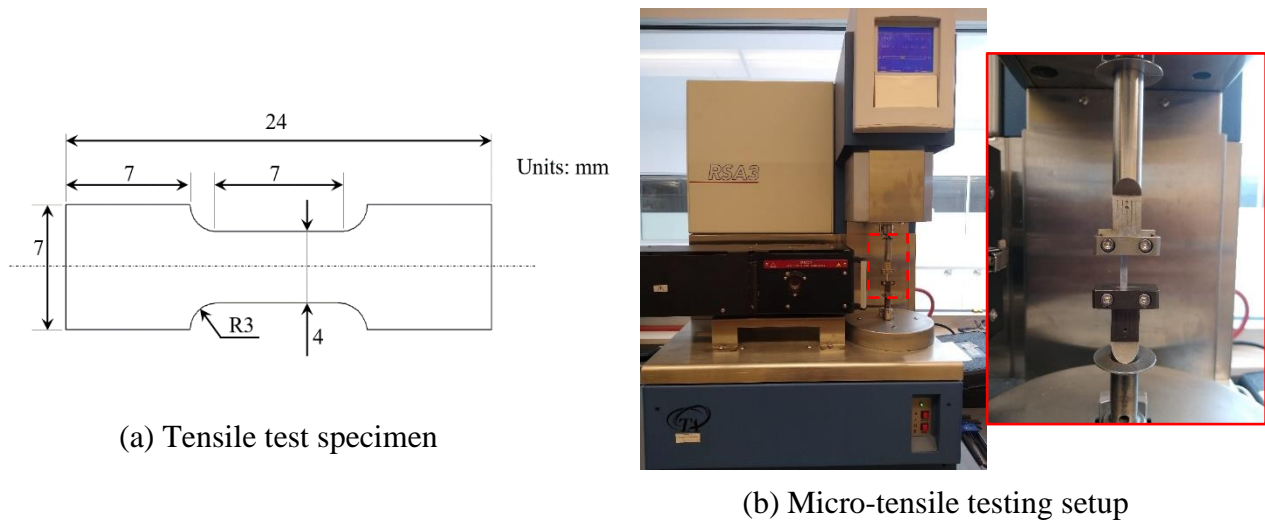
Micro-tensile test specimen and testing setup used for AL 1100 material
